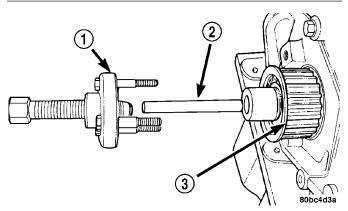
Camshaft Sprocket - Removal/Installation 1 - SPECIAL TOOL 6847
